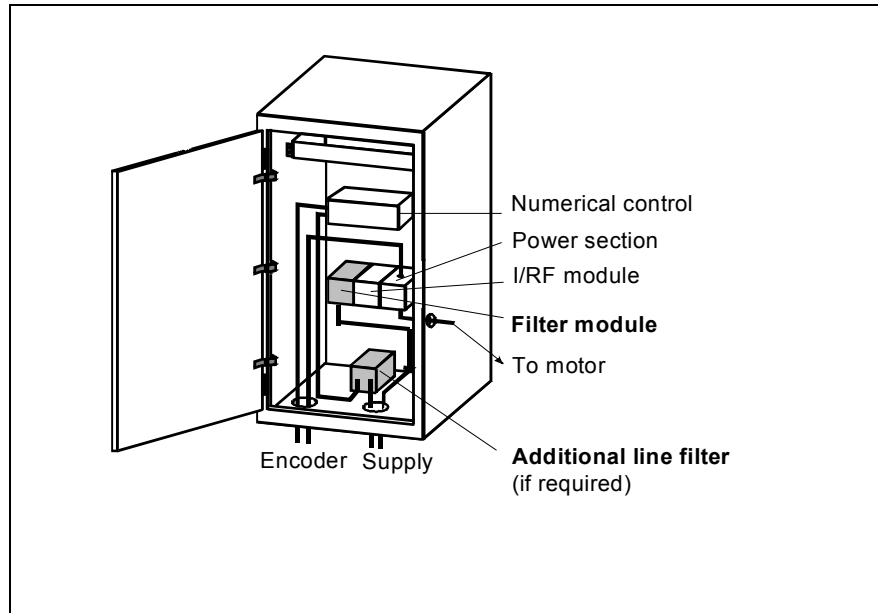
Example for a filter module and mains filter assembly (diagrammatic sketch)
